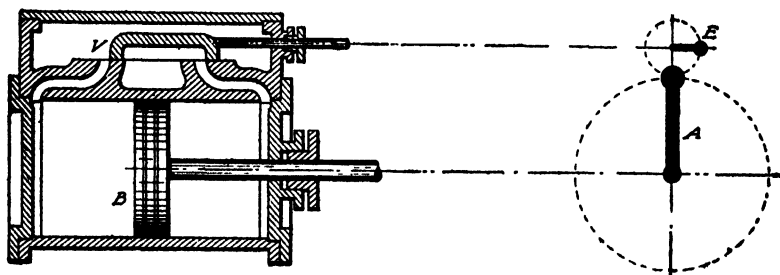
Position of Piston and Valve in Cylinder Shown in Fig. 3, after One-Half Stroke
